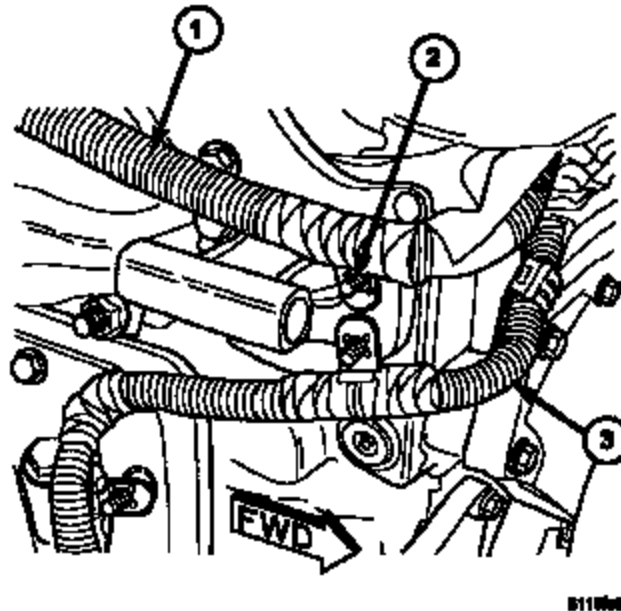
ALTERNATOR WIRING HARNESS MOUNTING
